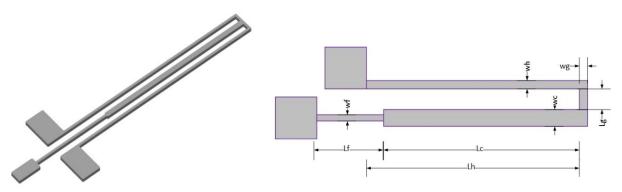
a) CAD design of the actuator, b) Dimensioning of the Electro-Thermal Actuator with symmetrical structure.
